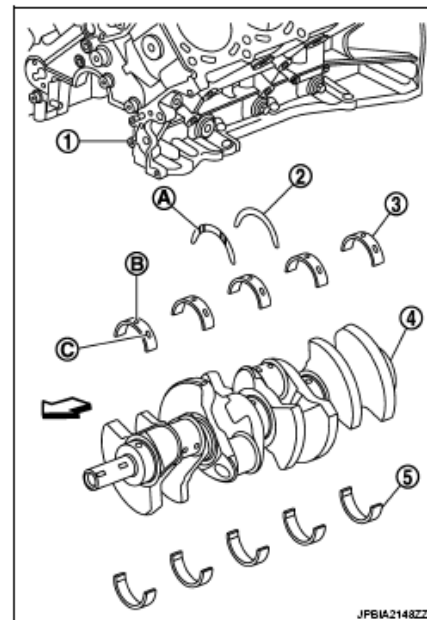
Identifying Cylinder Block And Thrust Bearings
